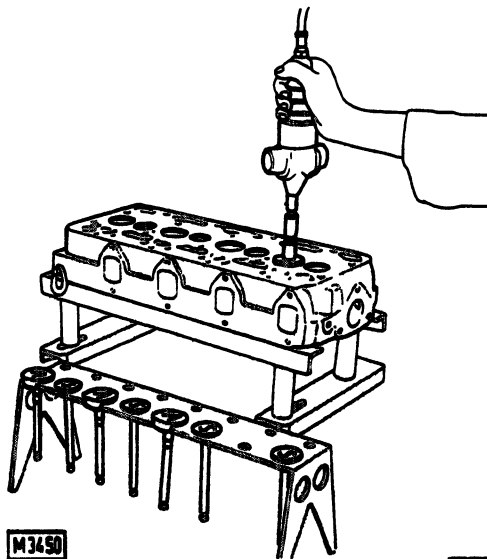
Grinding valves with pneumatic grinder 75290084.
